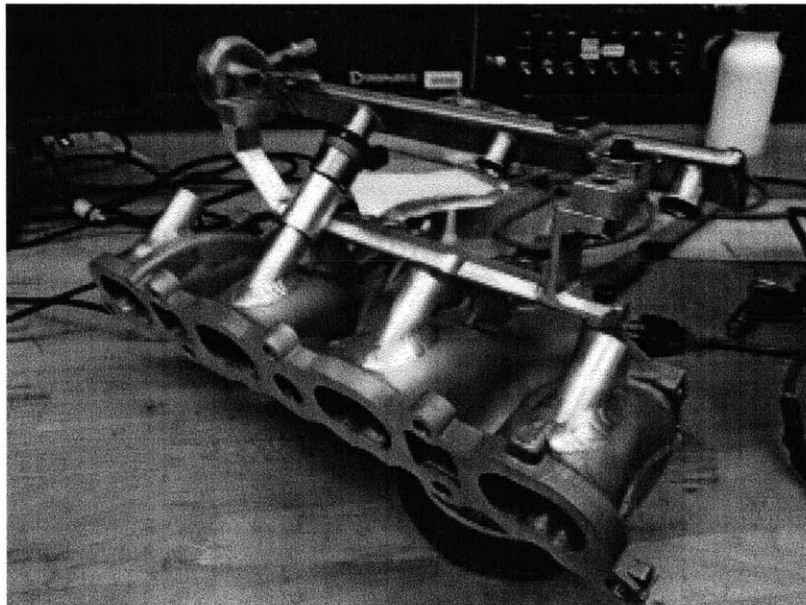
LNF Ecotec manifold with welded bosses to mate PFI injectors with the manifold.
